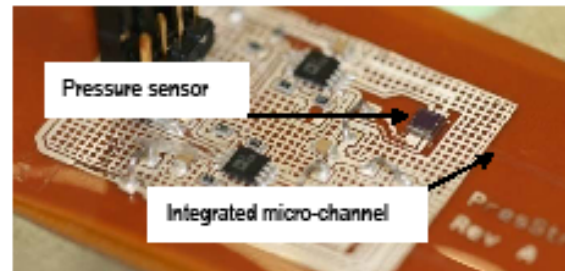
Pressure sensor on flexible PCB manufactured at Epigem
